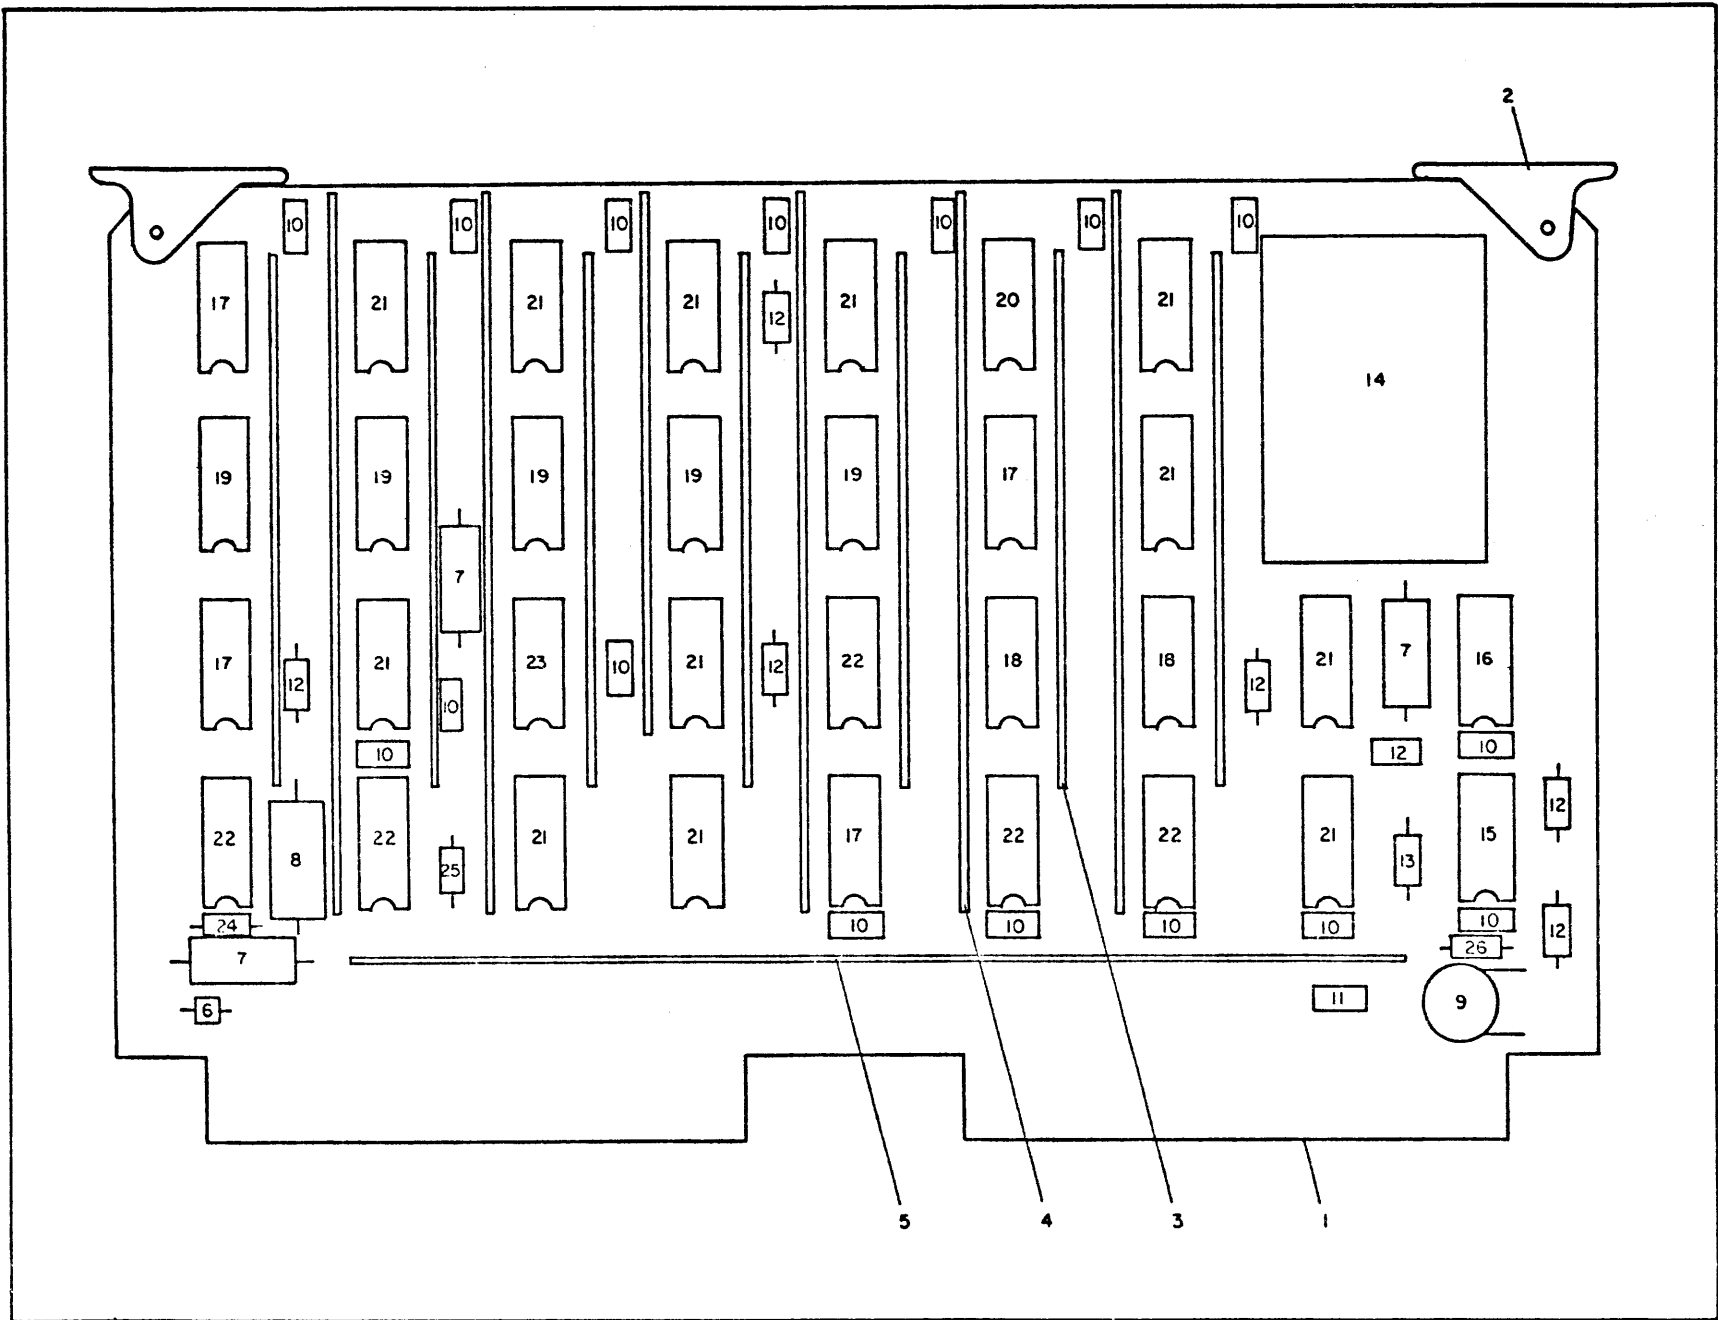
PC ASSEMBLY - CLOCK CARD
